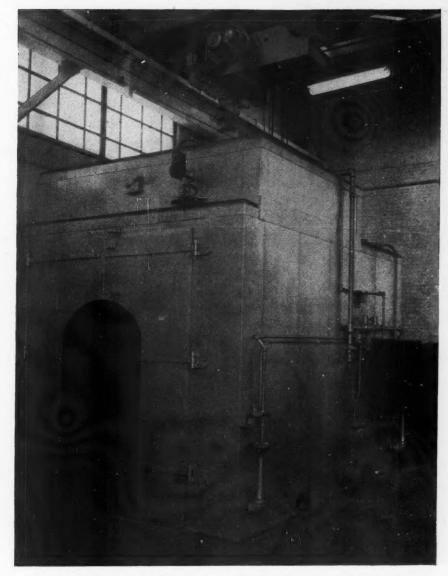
Typical gas fired batch or truck type oven in an electrical equipment manufacturing plant. Control equipment is at right. Unit suitable for production or service shops.
